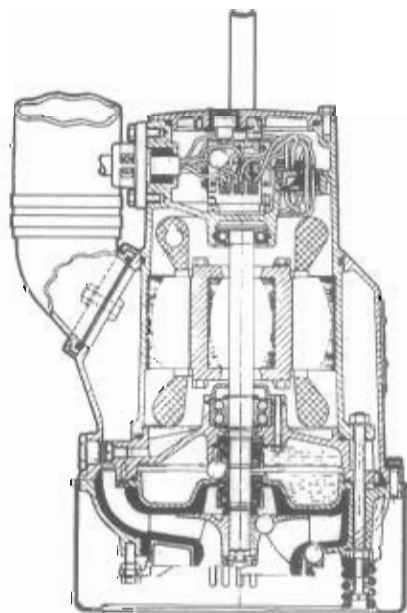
Cross-sectional arrangement of a heavy duty submersible pump
